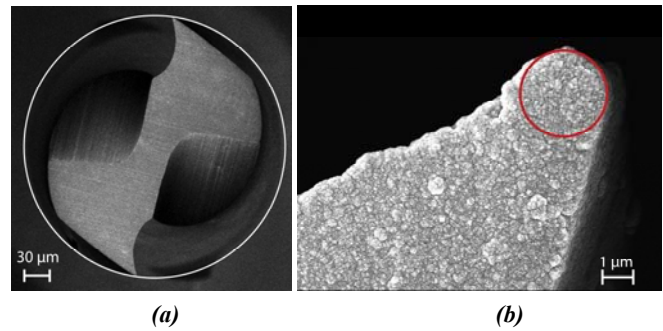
Examples of wear measurements: (a) end mill diameter measurement, (b) cutting edge radius measurement.
